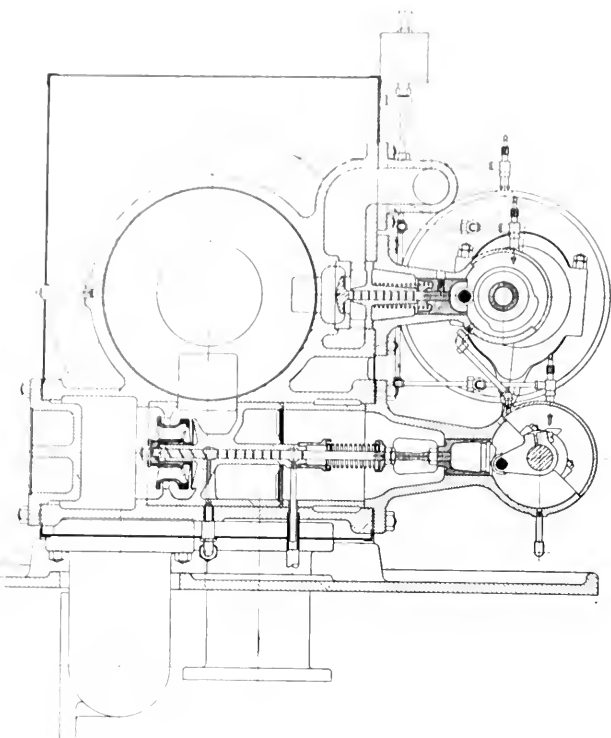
EXHAUST VALVE, AUXILIARY EXHAUST VALVE, AND VALVE GEAR
